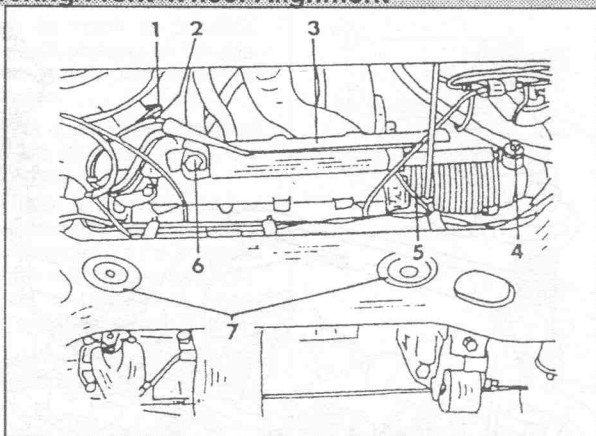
Details for the removal and installation of the power-assisted steering.
